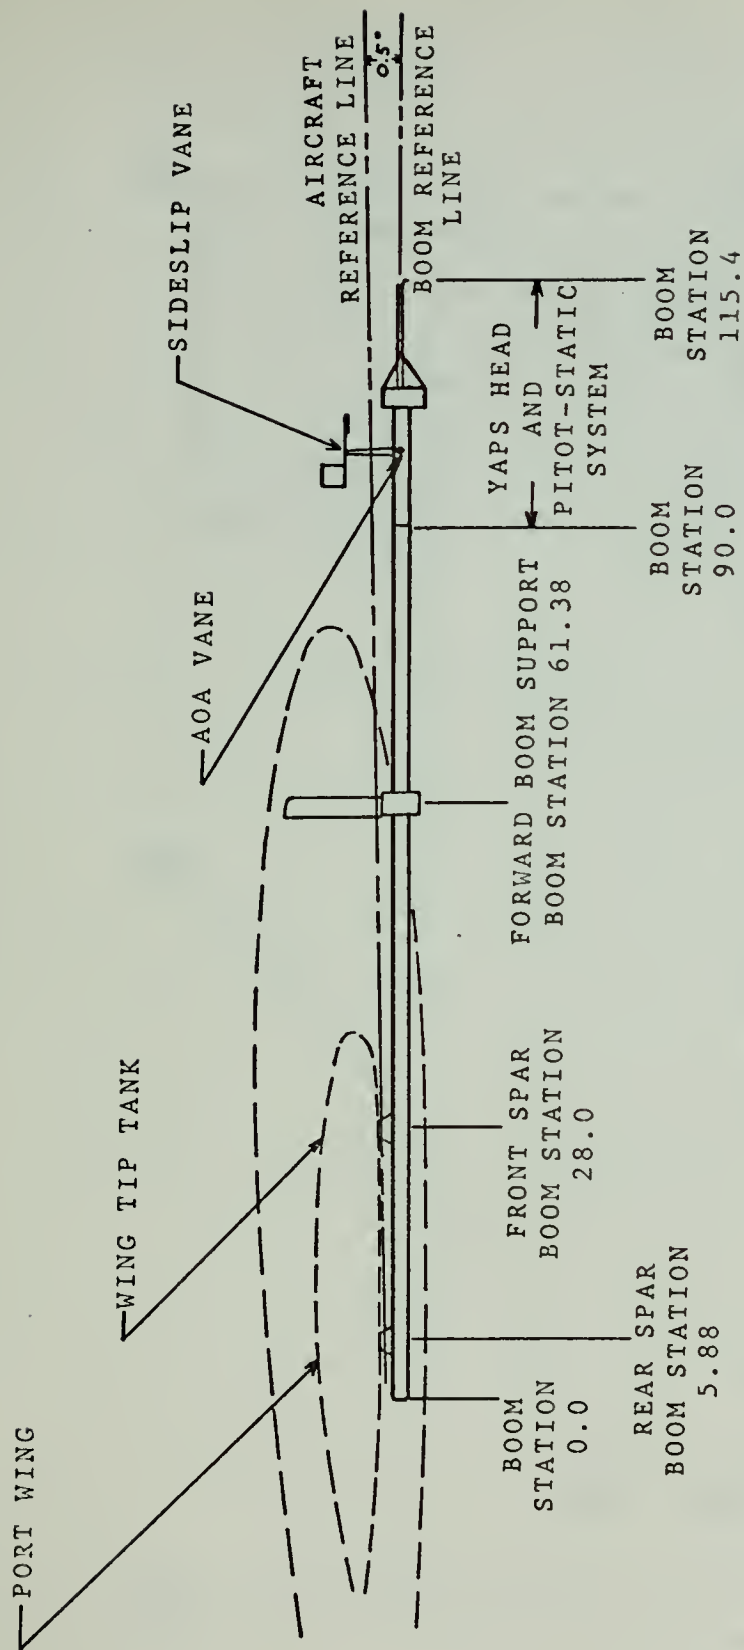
PITOT-STATIC BOOM DIMENSIONS
